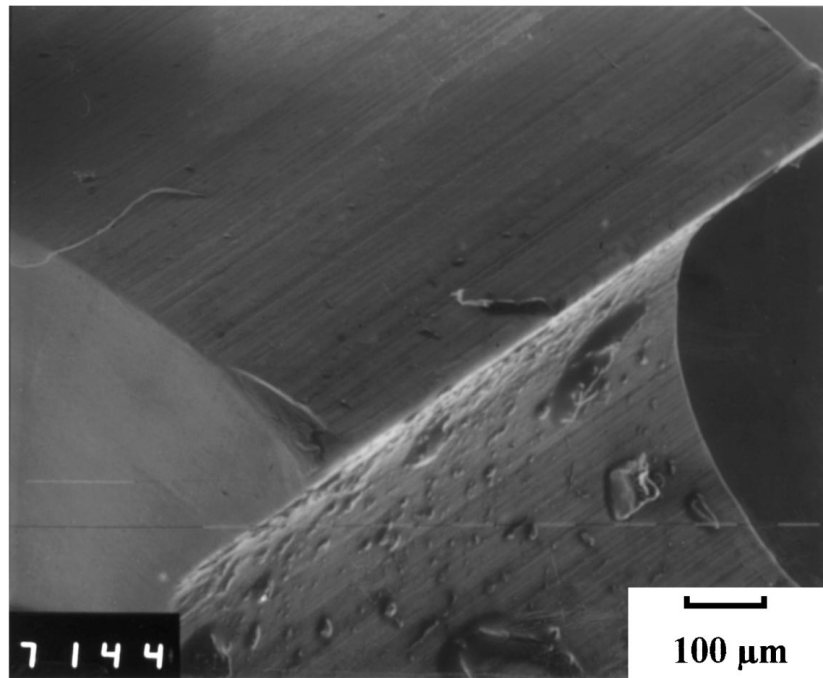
Wear mechanisms: Inconel 600L cutting tests.
